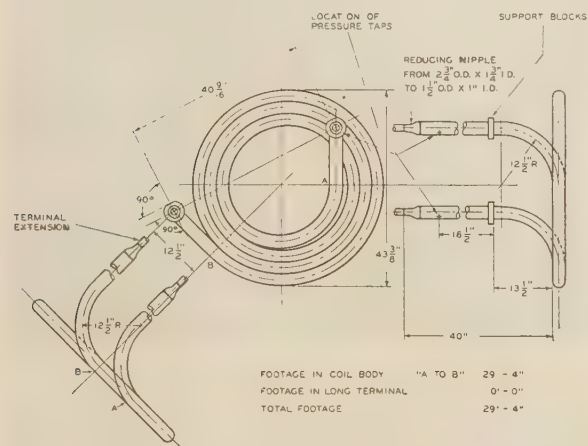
DETAILS OF TEST COIL, $2\frac{3}{4}$ IN. OD \times $1\frac{3}{4}$ IN. ID \times 30 FT LONG
